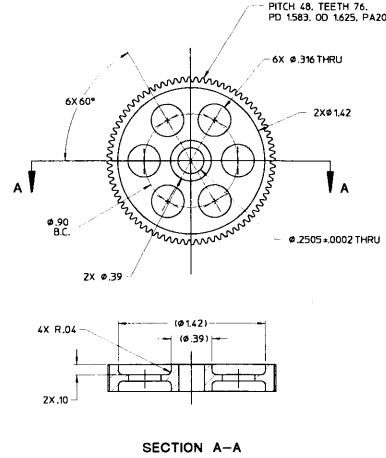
Portion of engineering drawing for low weight planet gear. The planets, along with the sun, ring and planet carrier were lightened extensively. Drawing dimensions are in inches.
